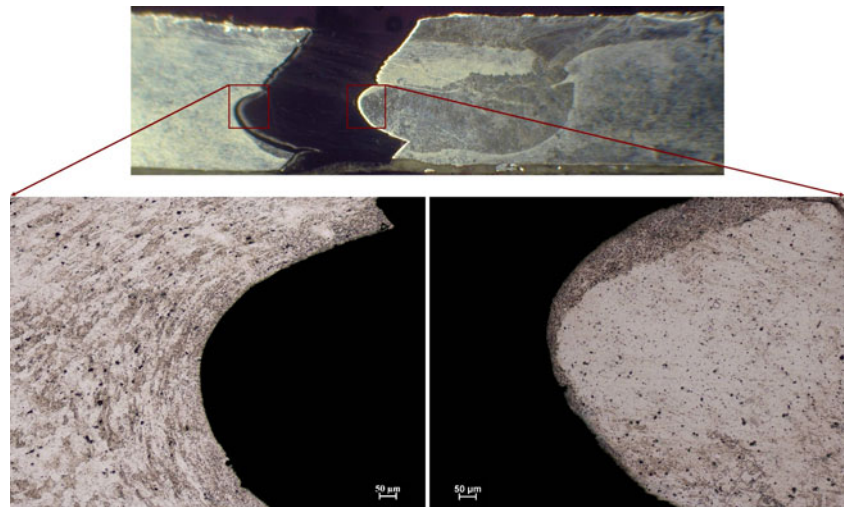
The fracture location in the tensile test specimen extracted from the 1000/150 T6 joint after PWHT
